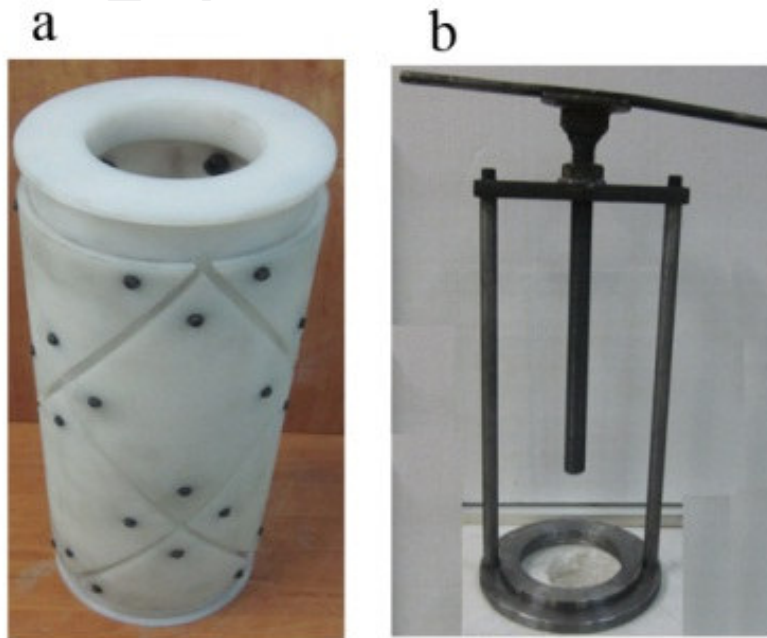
The complete inner and outer mold system (a) and the special fixture used to separate the specimen and the outer grooved mold from inner mold (b).
